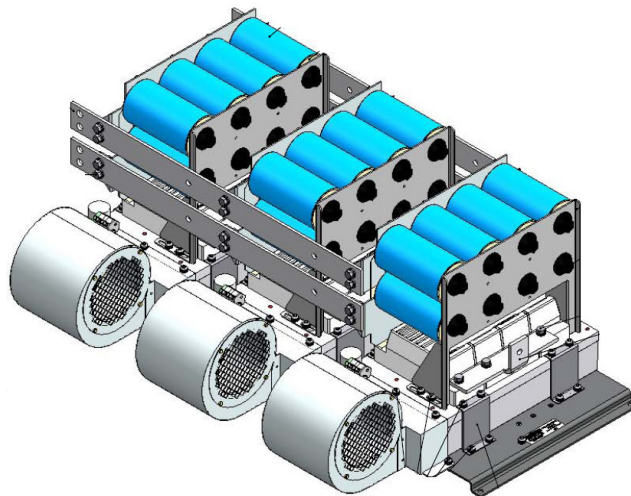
Assembly of the 4-fold SKiiP1242GB1204DU(D)L on the air-cooled heatsink P16.
